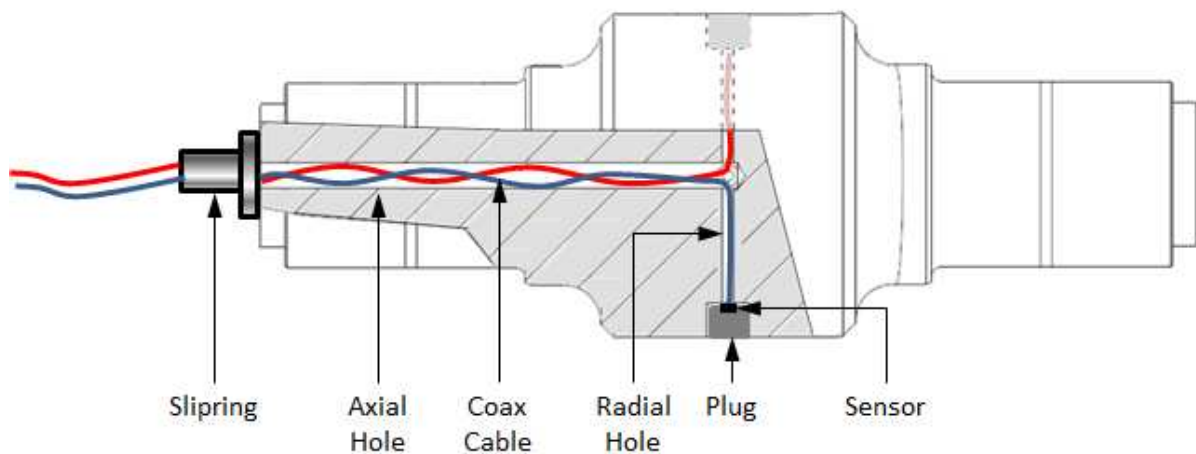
Section view of roll showing instrumented plug installation and wire routing.
